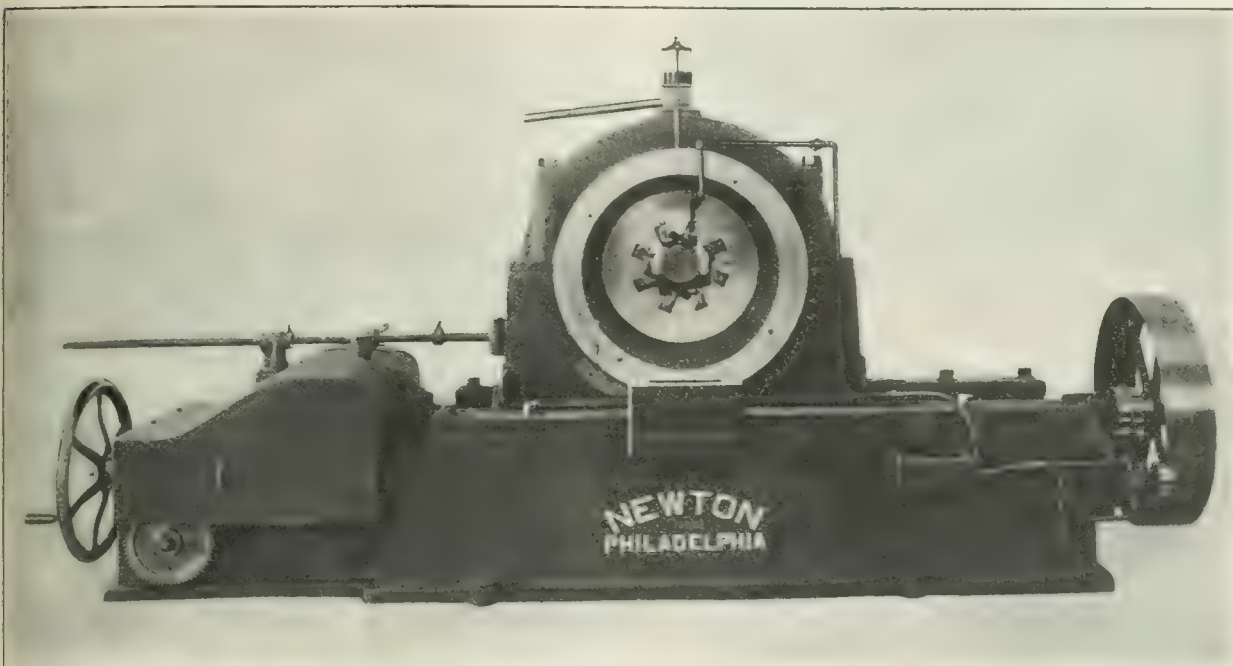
The Driving Side of a Cold Saw with Concave Blade Built by the Newton Machine Tool Works, Inc., Philadelphia, Pa.
